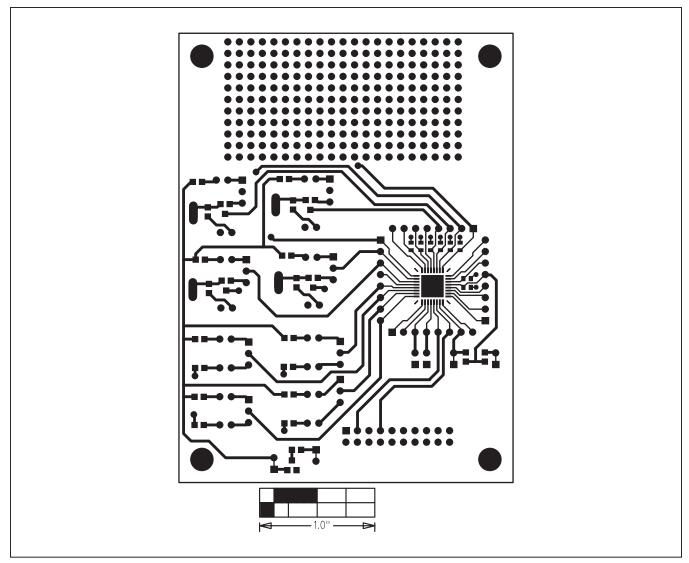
MAX6870 EV Kit PC Board Layout—Component Side
